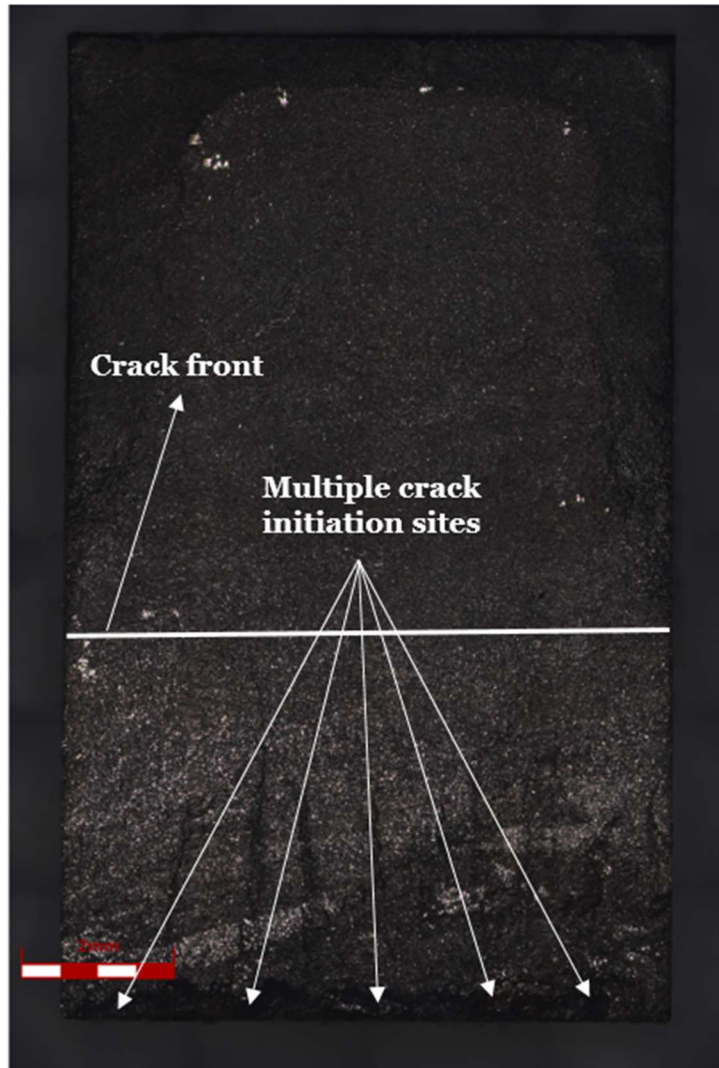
Confocal photograph of the fracture surface for the 8mm specimen and pad radius  $R=50\text{mm}$ .
